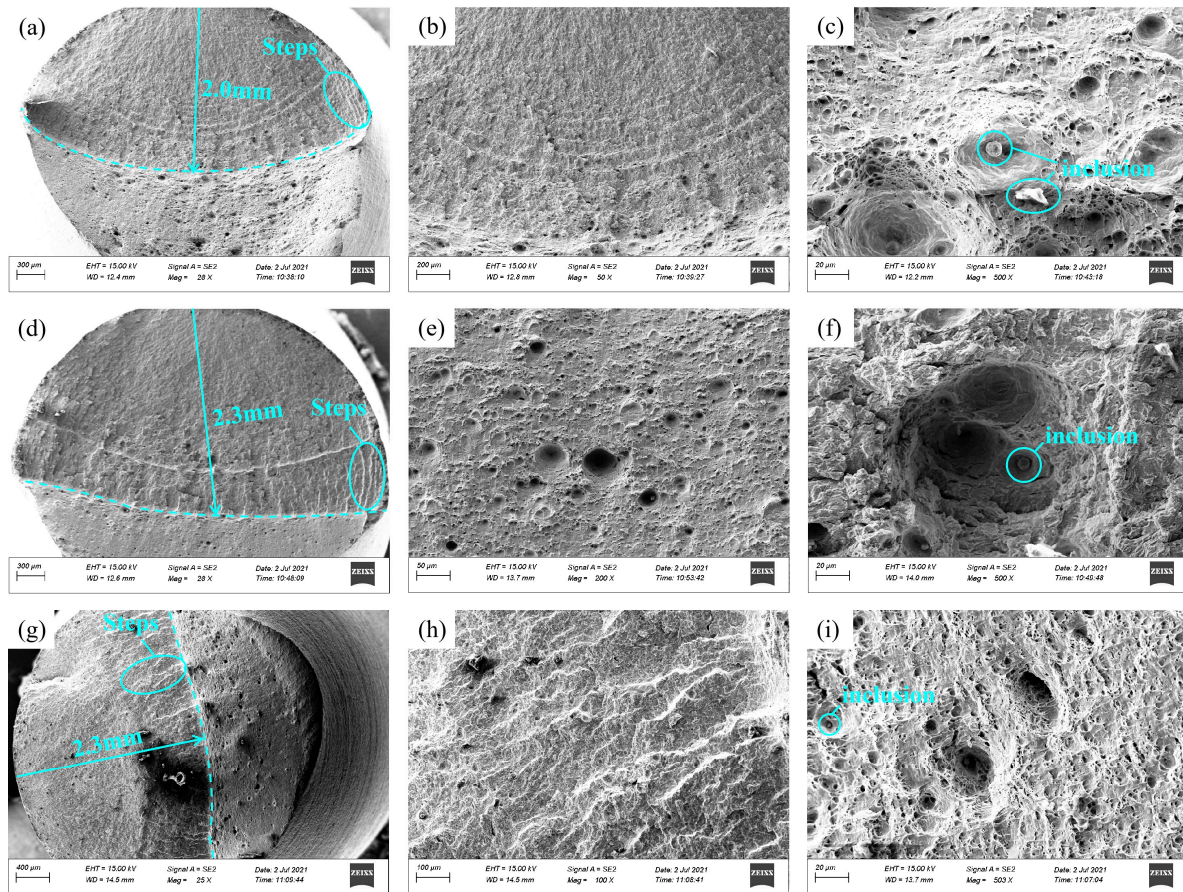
Fatigue fracture morphology of the specimens under the maximum stress of 480 MPa (a,d,g) macroscopic morphology; (b,e,h) II zone; (c,f,i) III zone.
